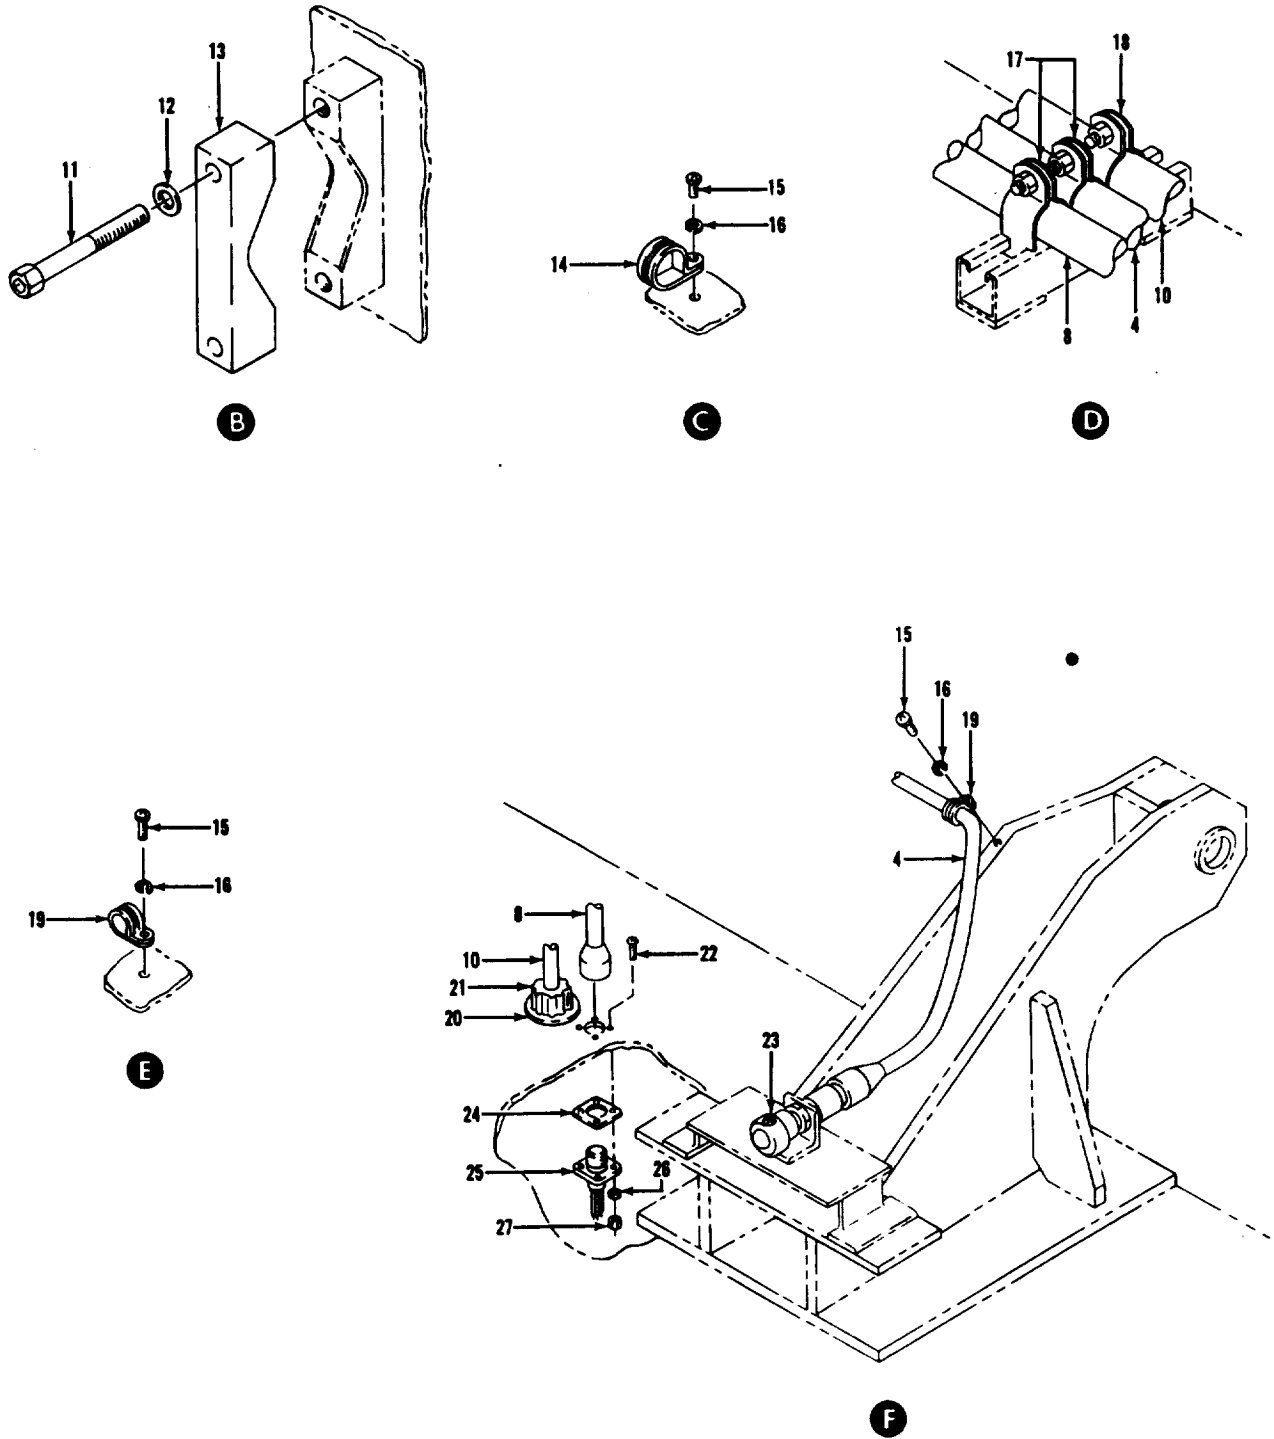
Electrical Equipment Installation (Sheet 3 of 19)
